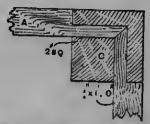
Horizontal Section of Leg and Rails of Box.
